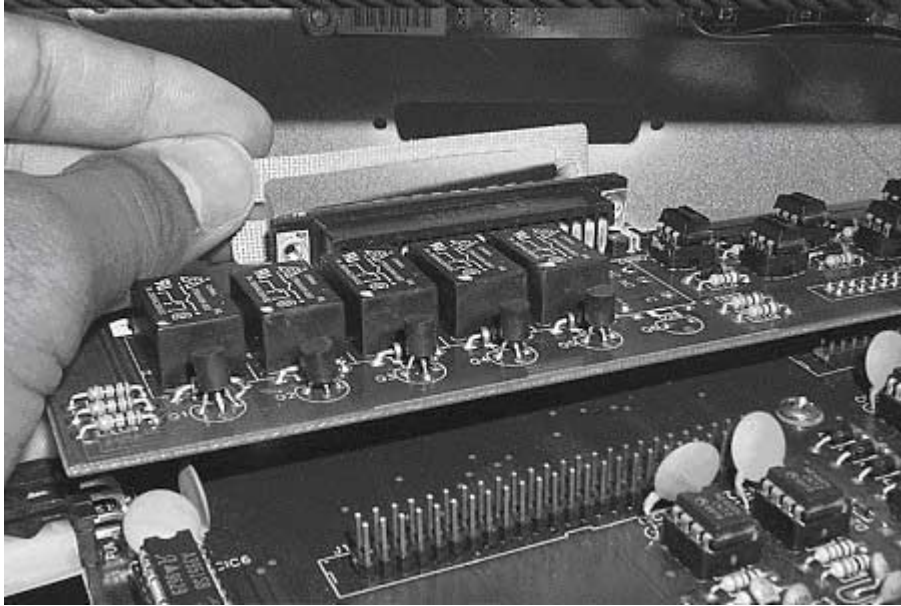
View of EMI gasket attaching to the Daughter board.
